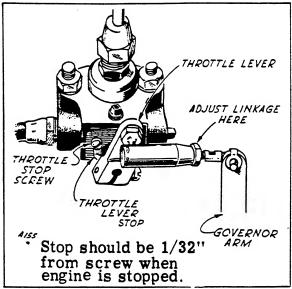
ADJUSTING THE THROTTLE LEVER
